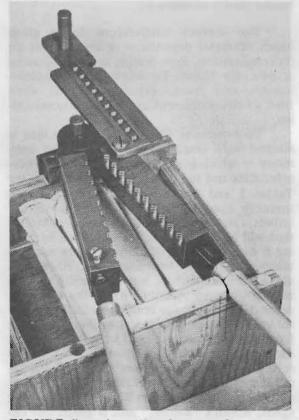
A casting box, as shown, supports the mold during pouring and contains padded material which prevents deforming of the bullets when they drop out of the mold.
